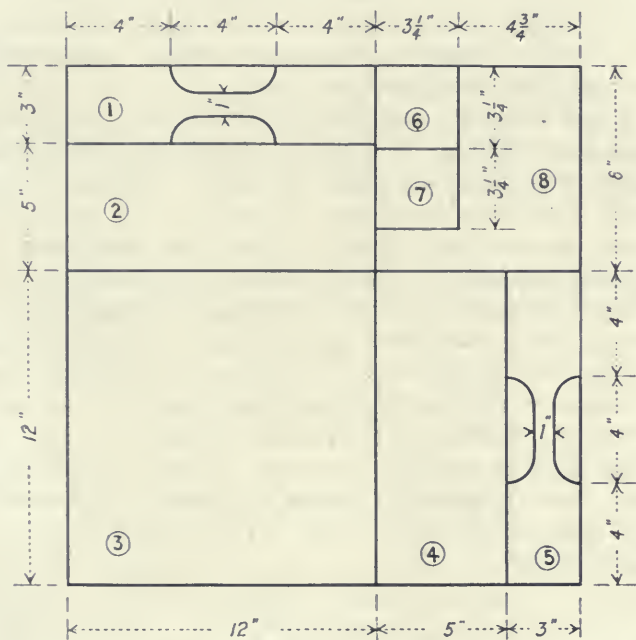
Cutting Diagram Showing Dimensions of Test Specimens.
